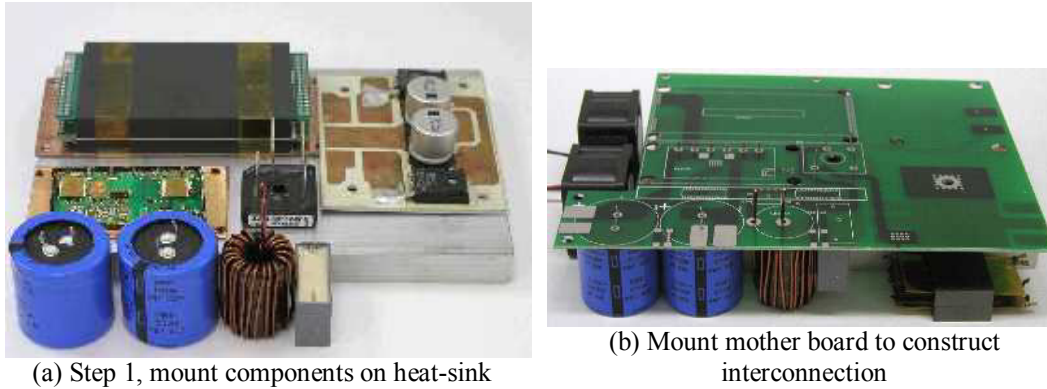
Assembly of IPERM-based front-end AC/DC converter.
